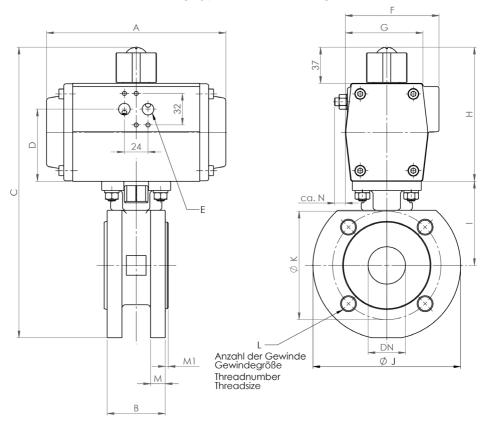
Dimensional drawing Type PKW with bar-agturn type GD-075 (exemplary presentation)
